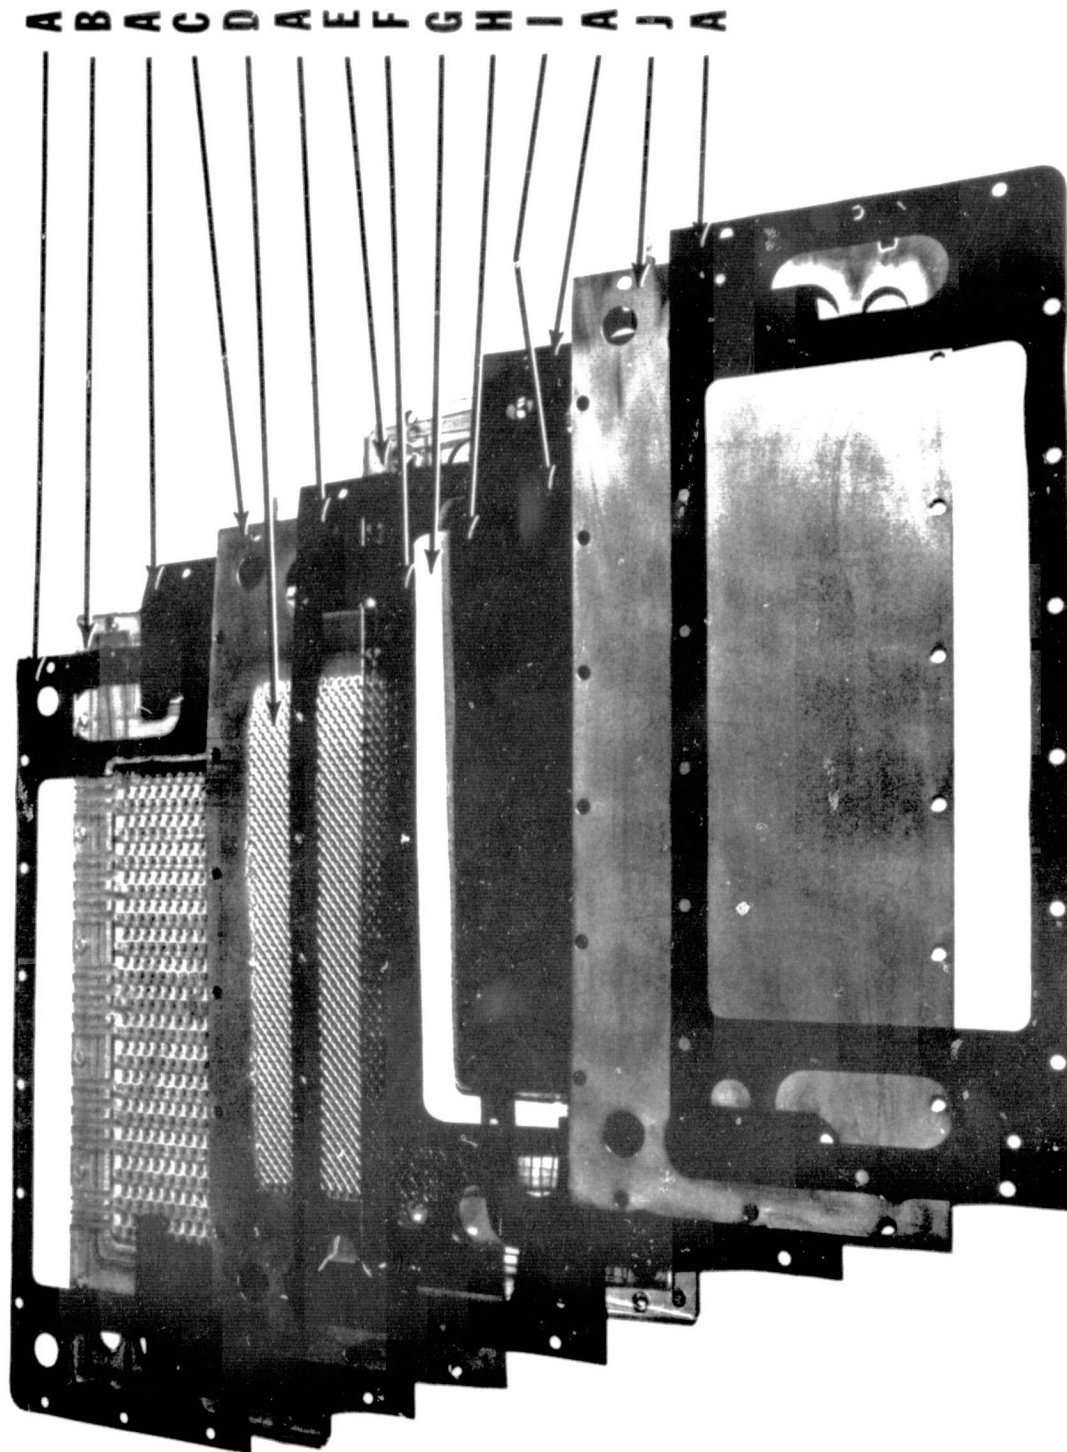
WVE OR EDC SINGLE-CELL ASSEMBLY PHOTOGRAPH
